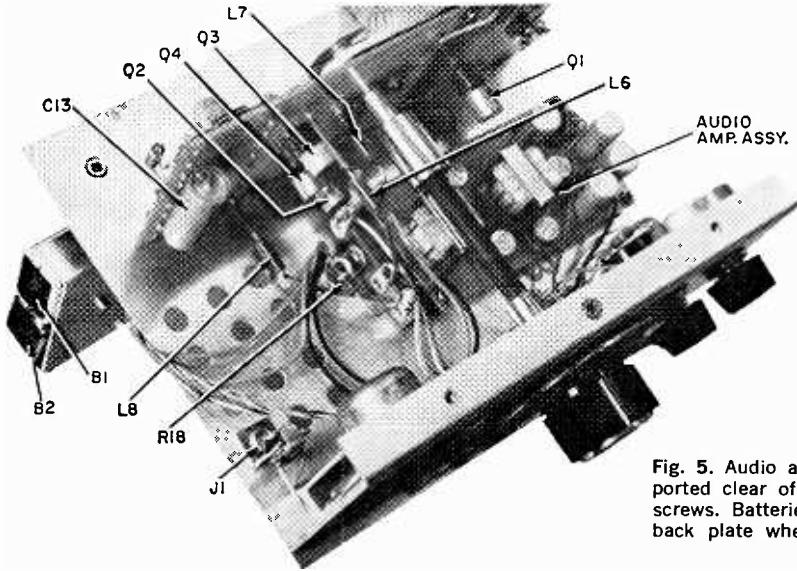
Audio amplifier board is supported clear of chassis on four long screws. Batteries in holder attach to back plate when unit is assembled.
